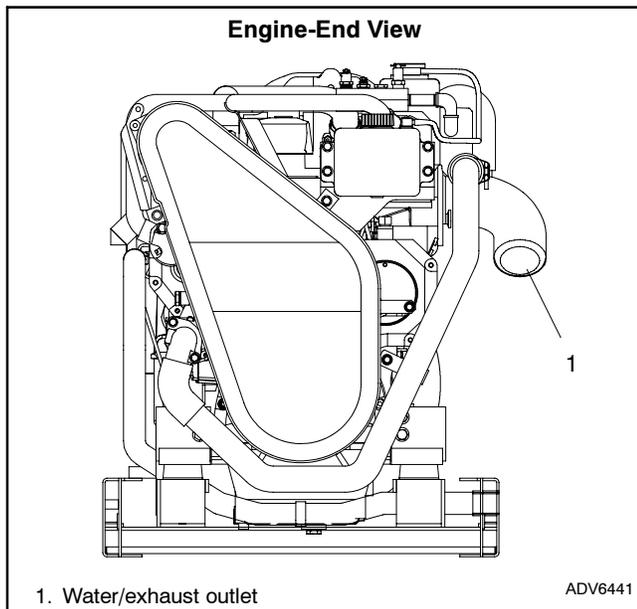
Mixer Elbow/Exhaust Connection, Typical
